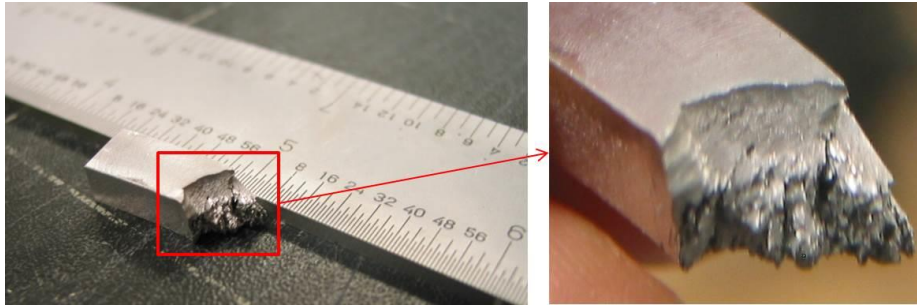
Macro defects in specimen #3975B-2 failed in the face bending testing
